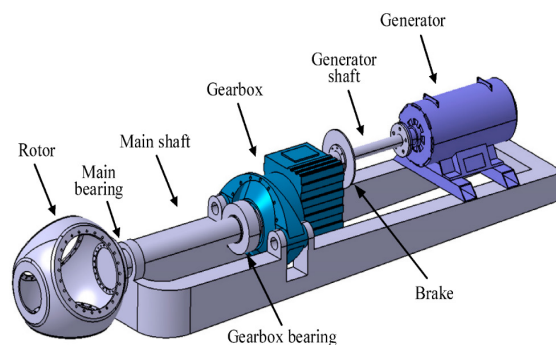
The wind turbine gearbox, which couples the main shaft and the generator shaft. Source: Qian, Ma, Zhang, <https://www.mdpi.com/1996-1073/10/10/1583/xml>.
